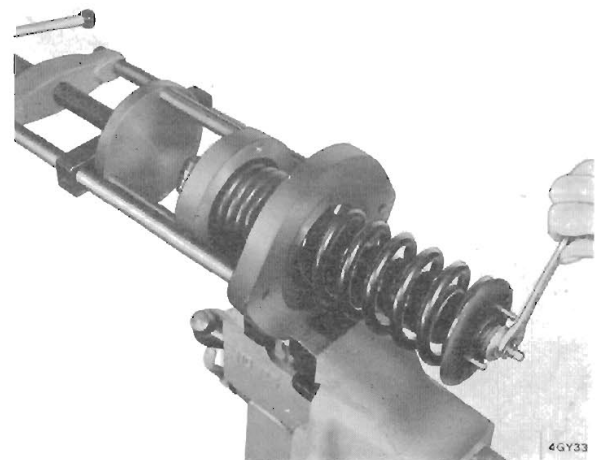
Using press S.4221A with adaptor S.4221A-5 to compress the front road spring
